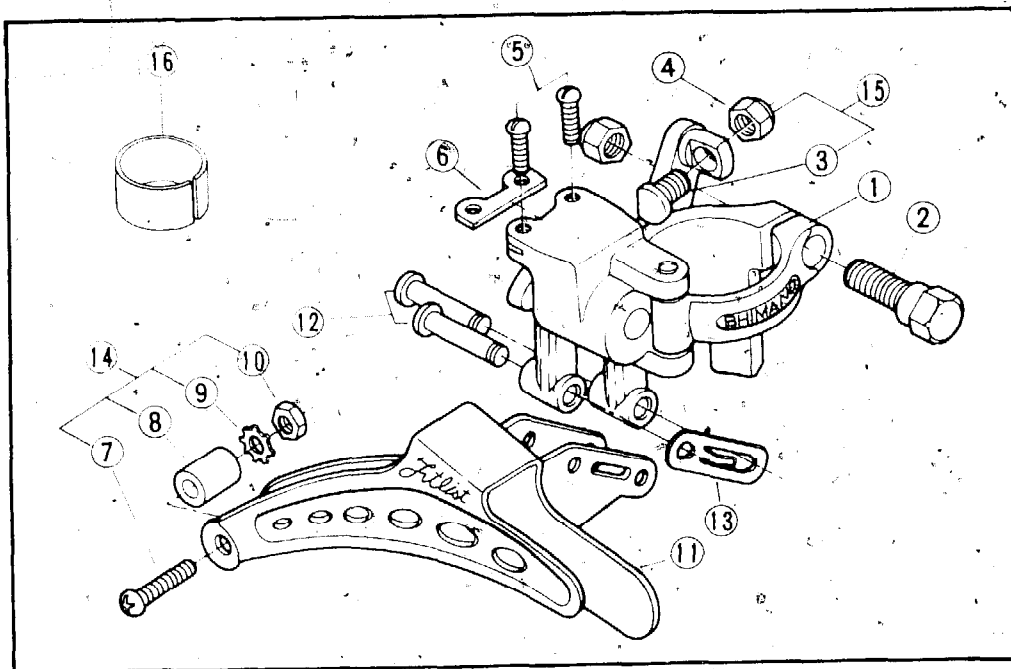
Shimano Titlist front derailleur. Parts are: (1) mechanism unit lower inlet type, (2) clamp bolt, (3) cable fixing bolt, (4) cable fixing nut, (5) adjusting bolt, (6) adjusting plate, (7) chain guide spacer bolt, (8) chain guide spacer, (9) toothed lock washer, (10) nut, (11) chain guide, (12) pin A, (13) clip A, (14) chain guide spacer and bolt set, (15) cable fixing bolt and nut set and (16) 1-inch bushing.
